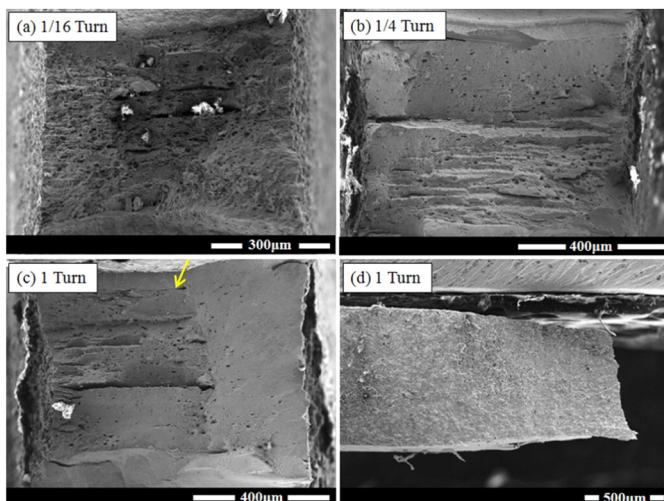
Fracture surface of the tensile samples after (a) 1/16 turn, (b) 1/4 turn and (c) 1 turn of HPT. (d) The side view of the fractured gage region after 1 turn of HPT.
